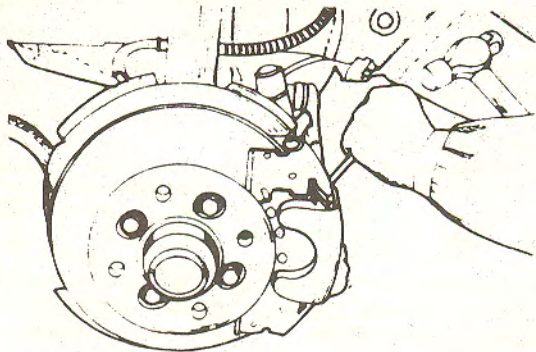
Drive out the wedges with a suitable drift when replacing the front brake pads.
